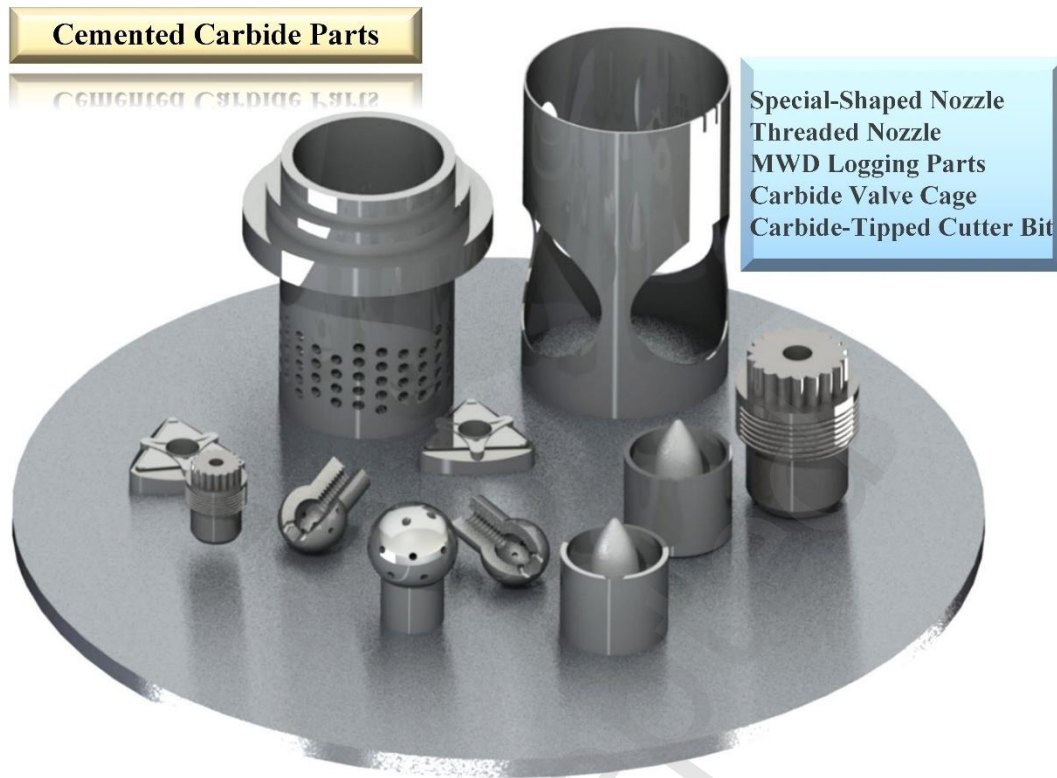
Examples of typical complex cemented carbide parts: special-shaped nozzle, threaded nozzle, measurement while drilling (MWD) logging parts, carbide valve cage and carbide-tipped cutter bit. All samples were produced through PM methods, plus postprocessing (grinding and polishing) (adapted from Ref. [3])
